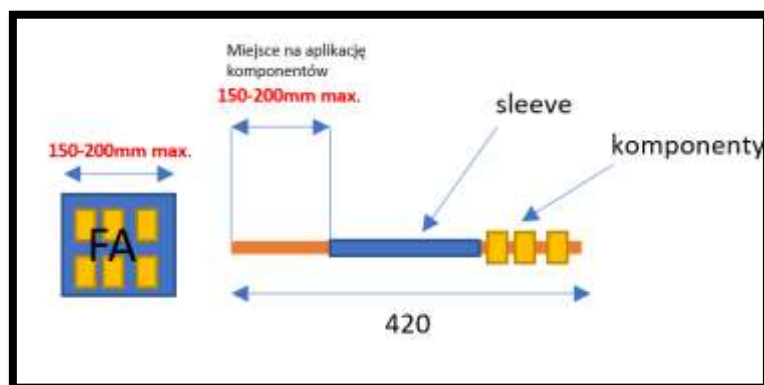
photo showing the shortest variant that will be applied to the machine. Our working space, due to the length of the cable and sleeve, can not exceed 20cm;
